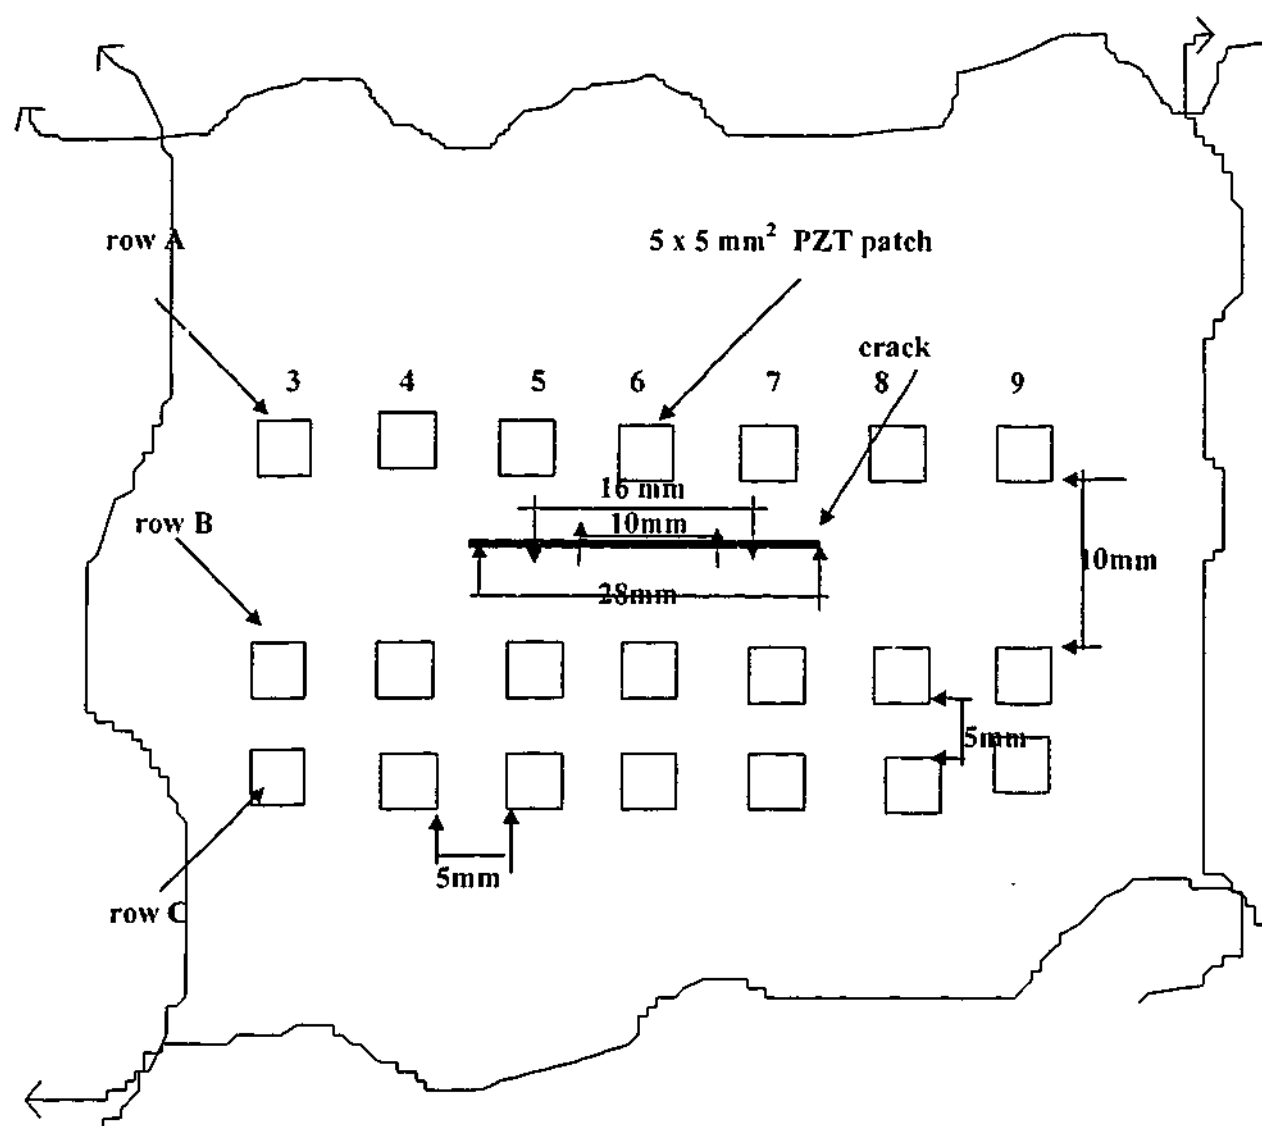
Detailed position of the occurred fatigue cracks in the test Plate
